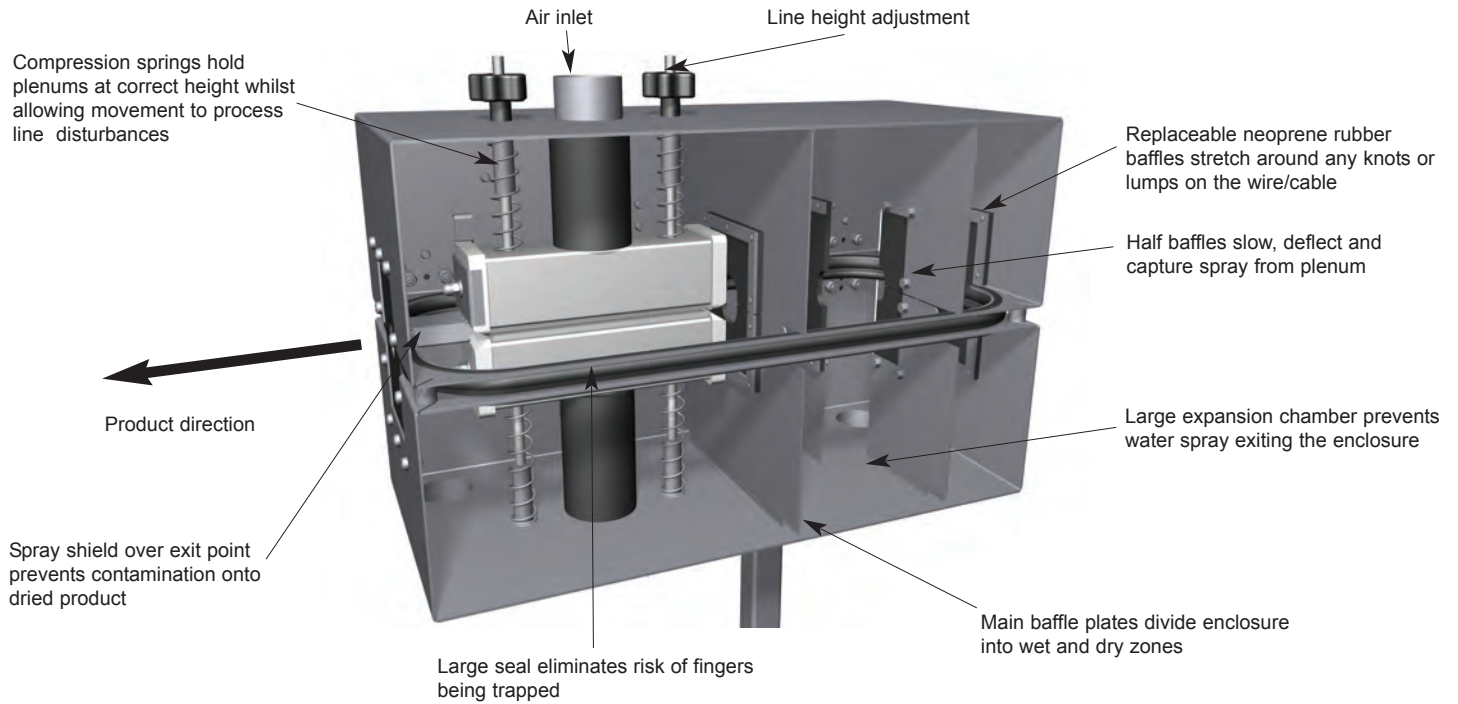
Option 1 (Spray Enclosure) outline drawing
